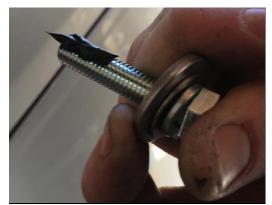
Silicone Sealant Applied to the M8 Mounting Hardware
